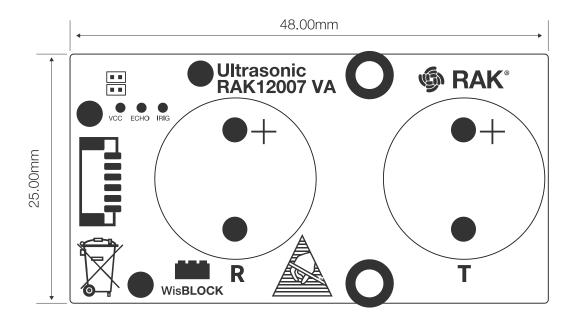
RAK12007 WisBlock Ultrasonic Sensor Mechanic Drawing
